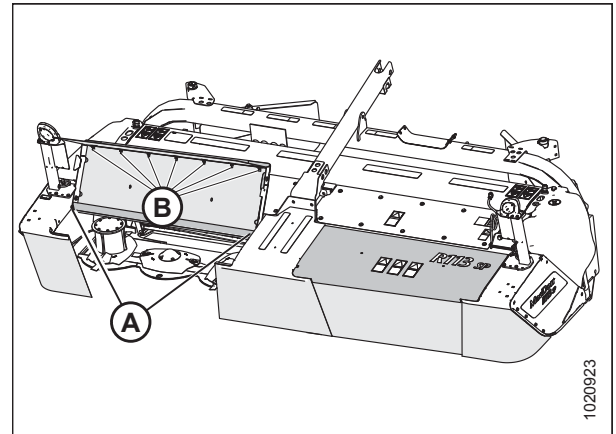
Cutterbar Door (Right Side Shown, Left Opposite)
